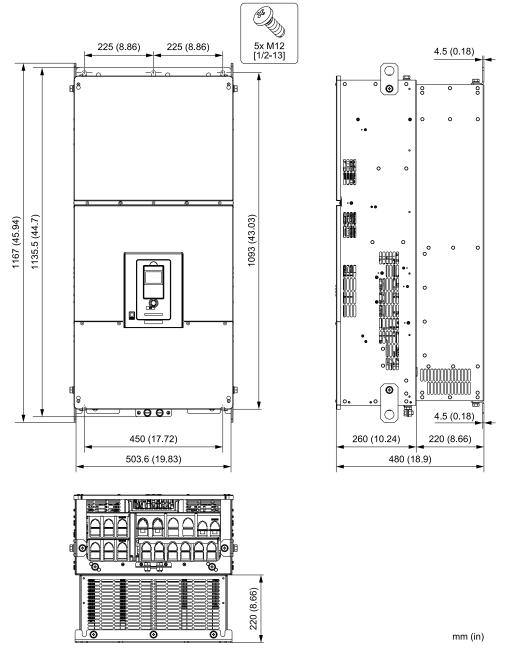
Exterior and Mounting Dimensions Diagram 3
